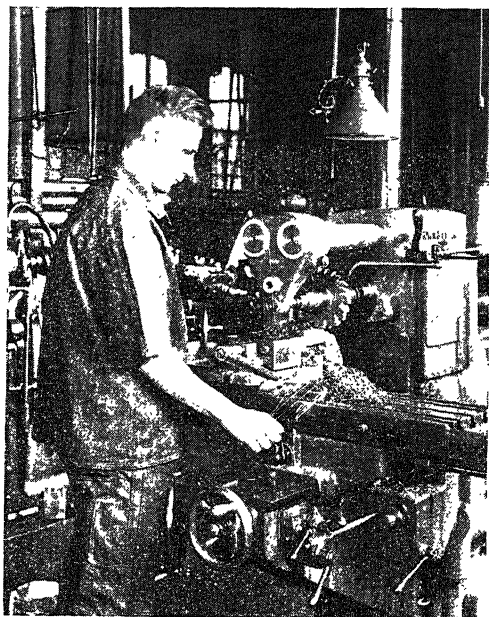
A side milling operation in a column and knee type plain milling machine. (Courtesy of Brown & Sharpe Manufacturing Company.)
